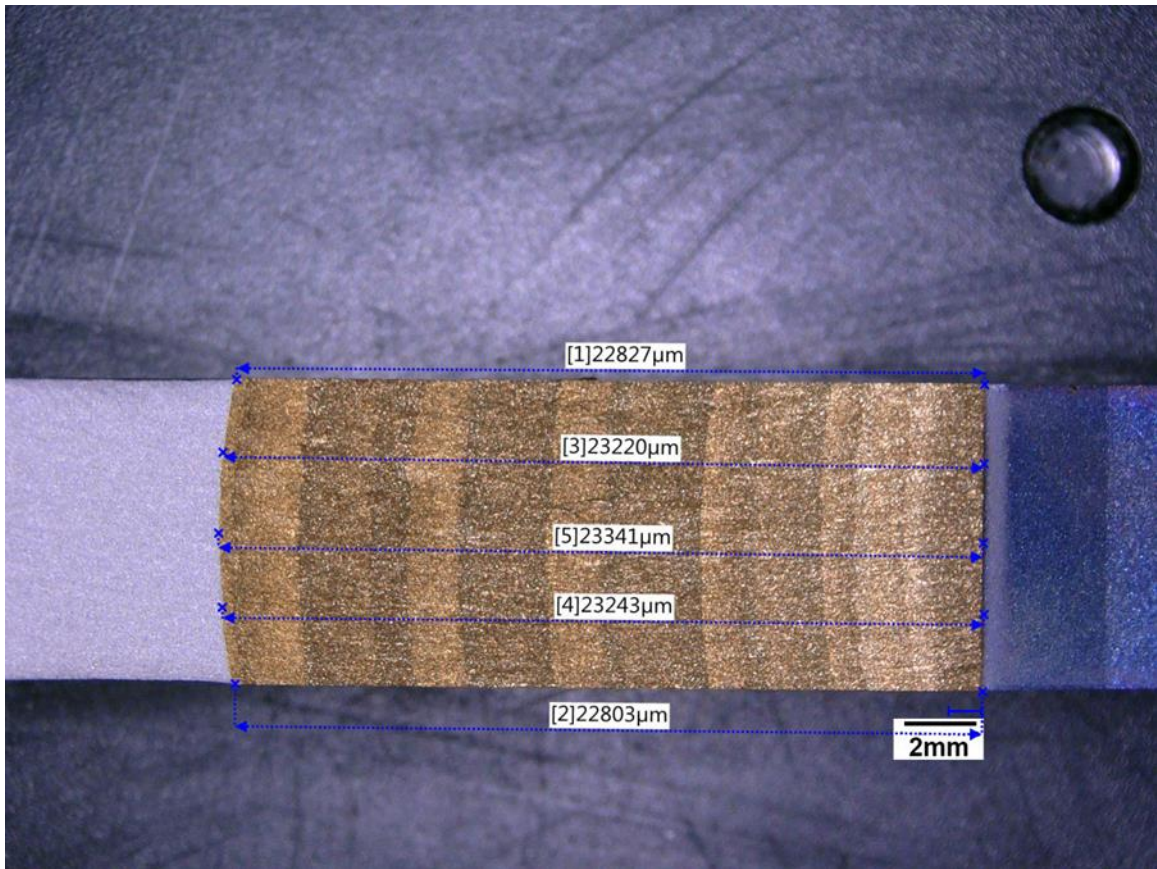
Details of Fractographic Crack Length Measurement
